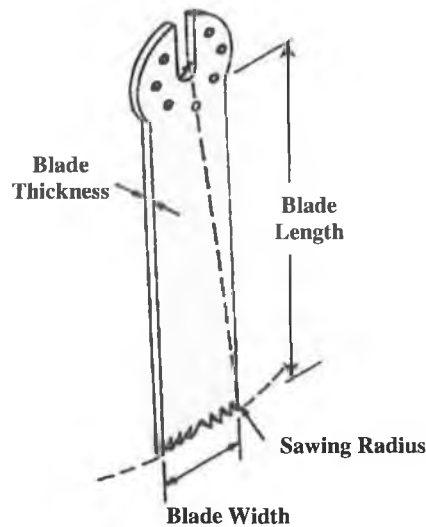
Oscillating saw blade dimensions (Ark et al., 1997a)
